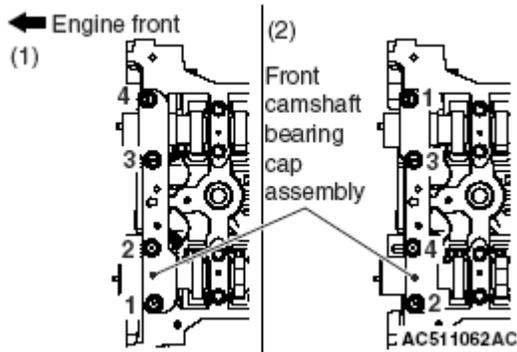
Identifying Front Camshaft Bearing Cap Assembly
